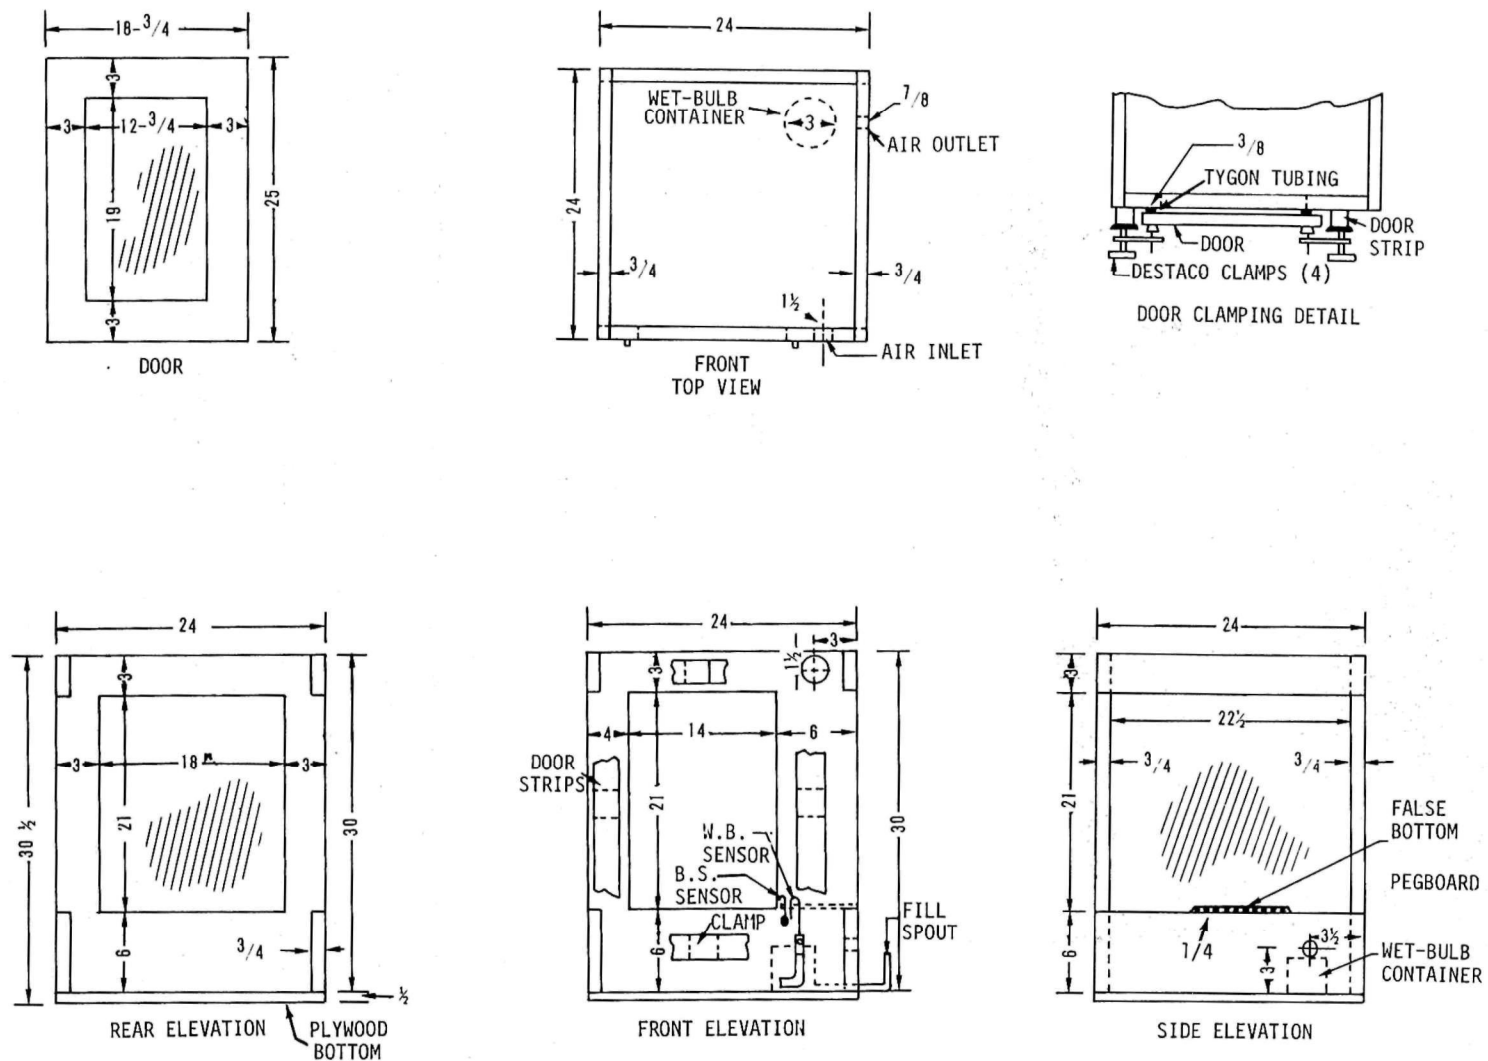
Details of exposure chamber design. (All dimensions shown are in inches.)
